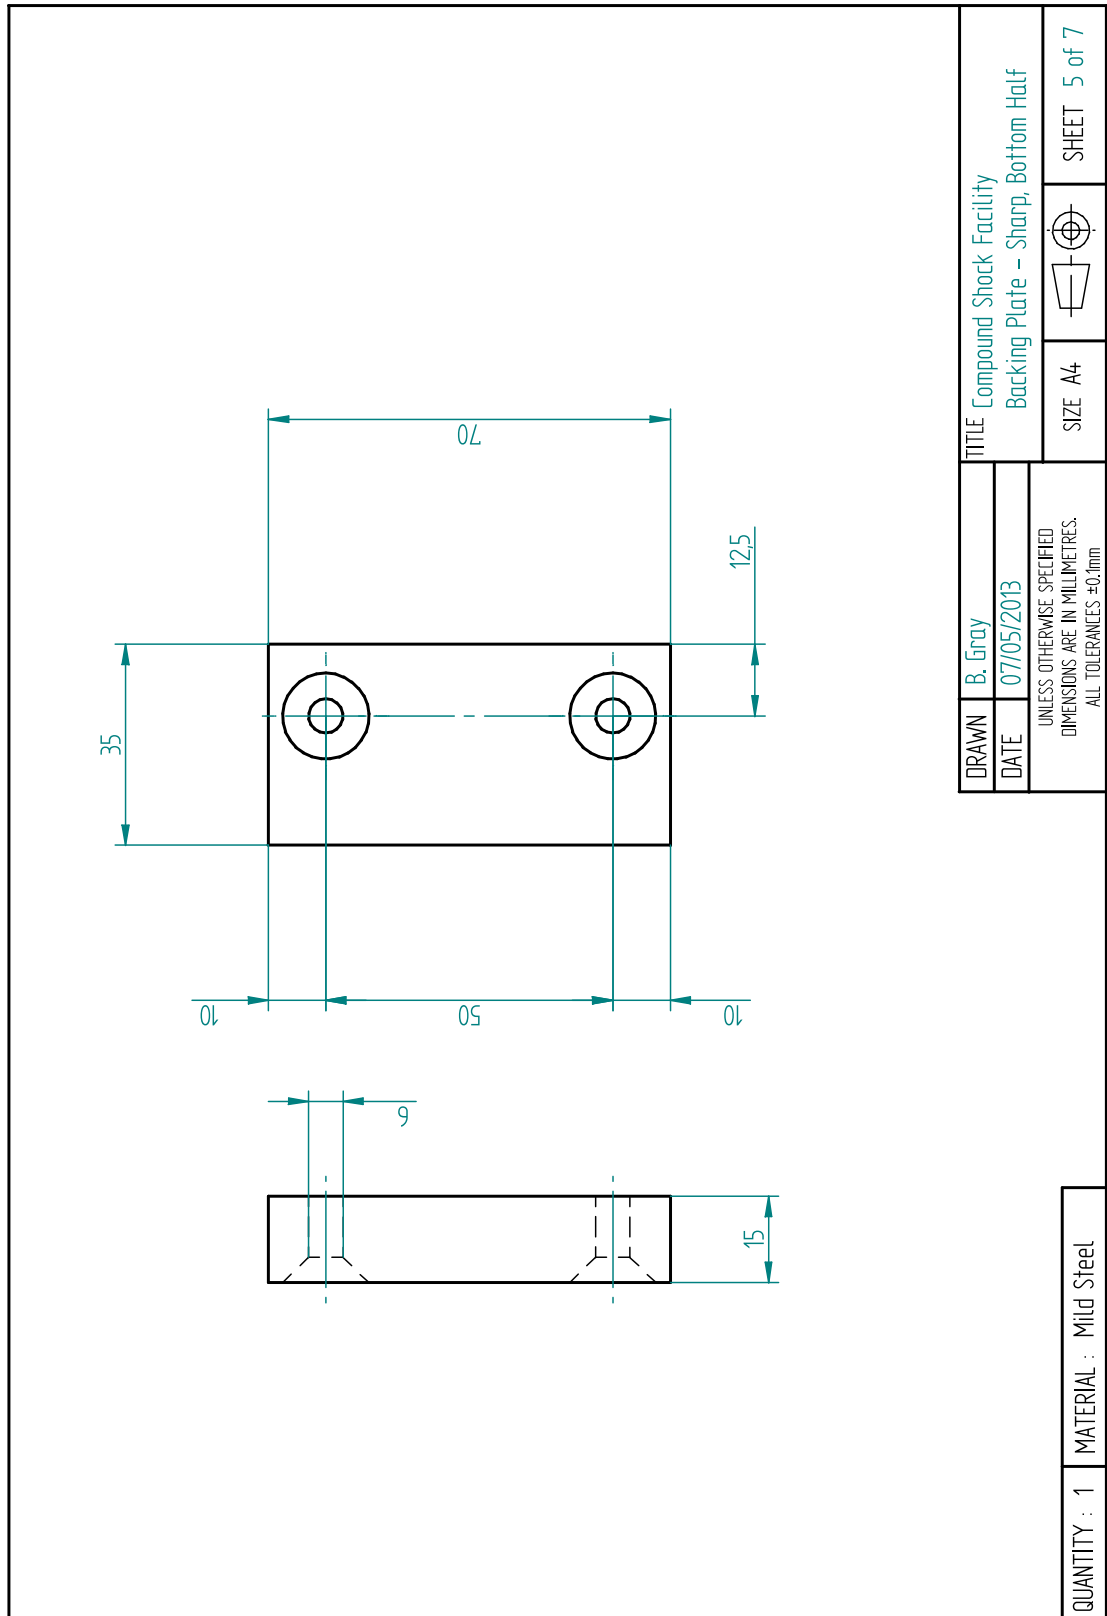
Engineering drawing of the sharp compound shock backing plate - lower portion
